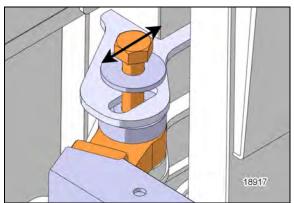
LOWER ARM ADJUSTMENT SCREW
